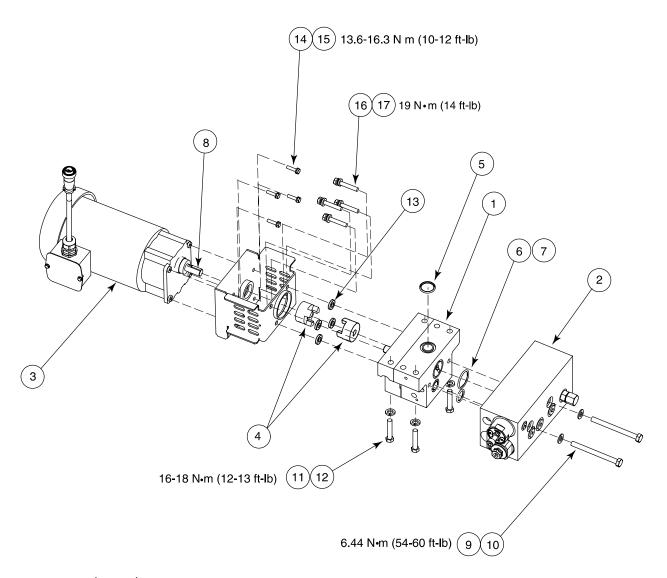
1 /₄ and 1 /₆ hp drive assembly
